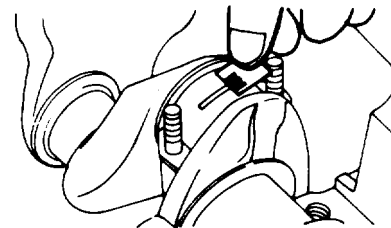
Measuring Lubrication (Oil) Clearance (II)
